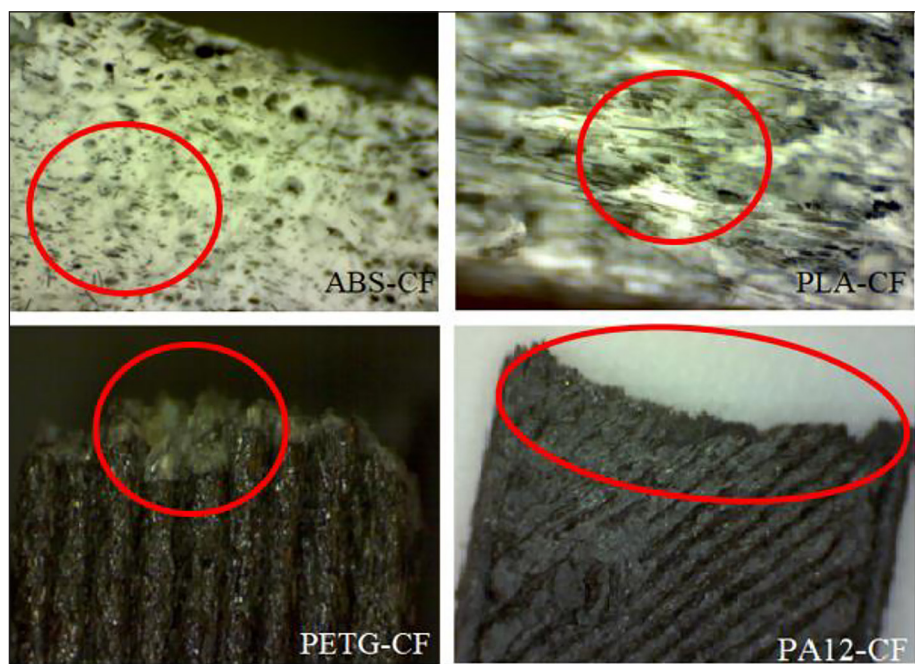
Microscopic imaging of composite polymer samples (after tensile test – fracture surface); black threads of carbon fiber visible
